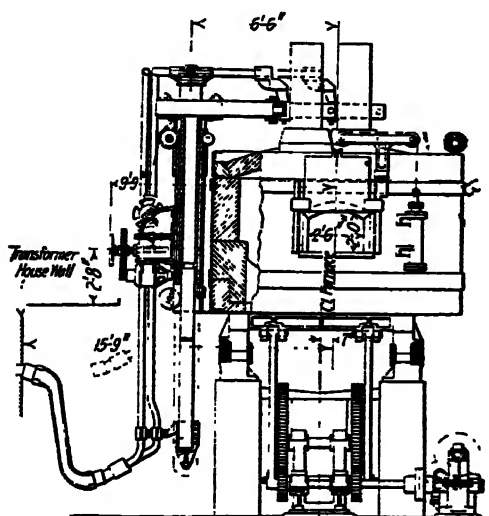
Rear view of latest model 7-ton Heroult furnace showing new arrangement of electrode holders.
